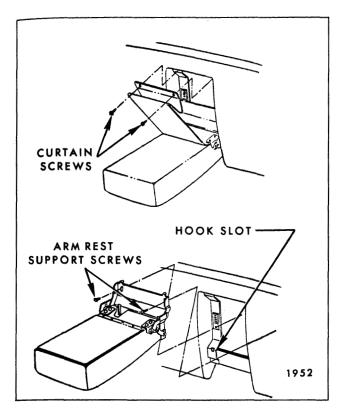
Front Seat Center Arm Rest (Full Width Seat Back)
